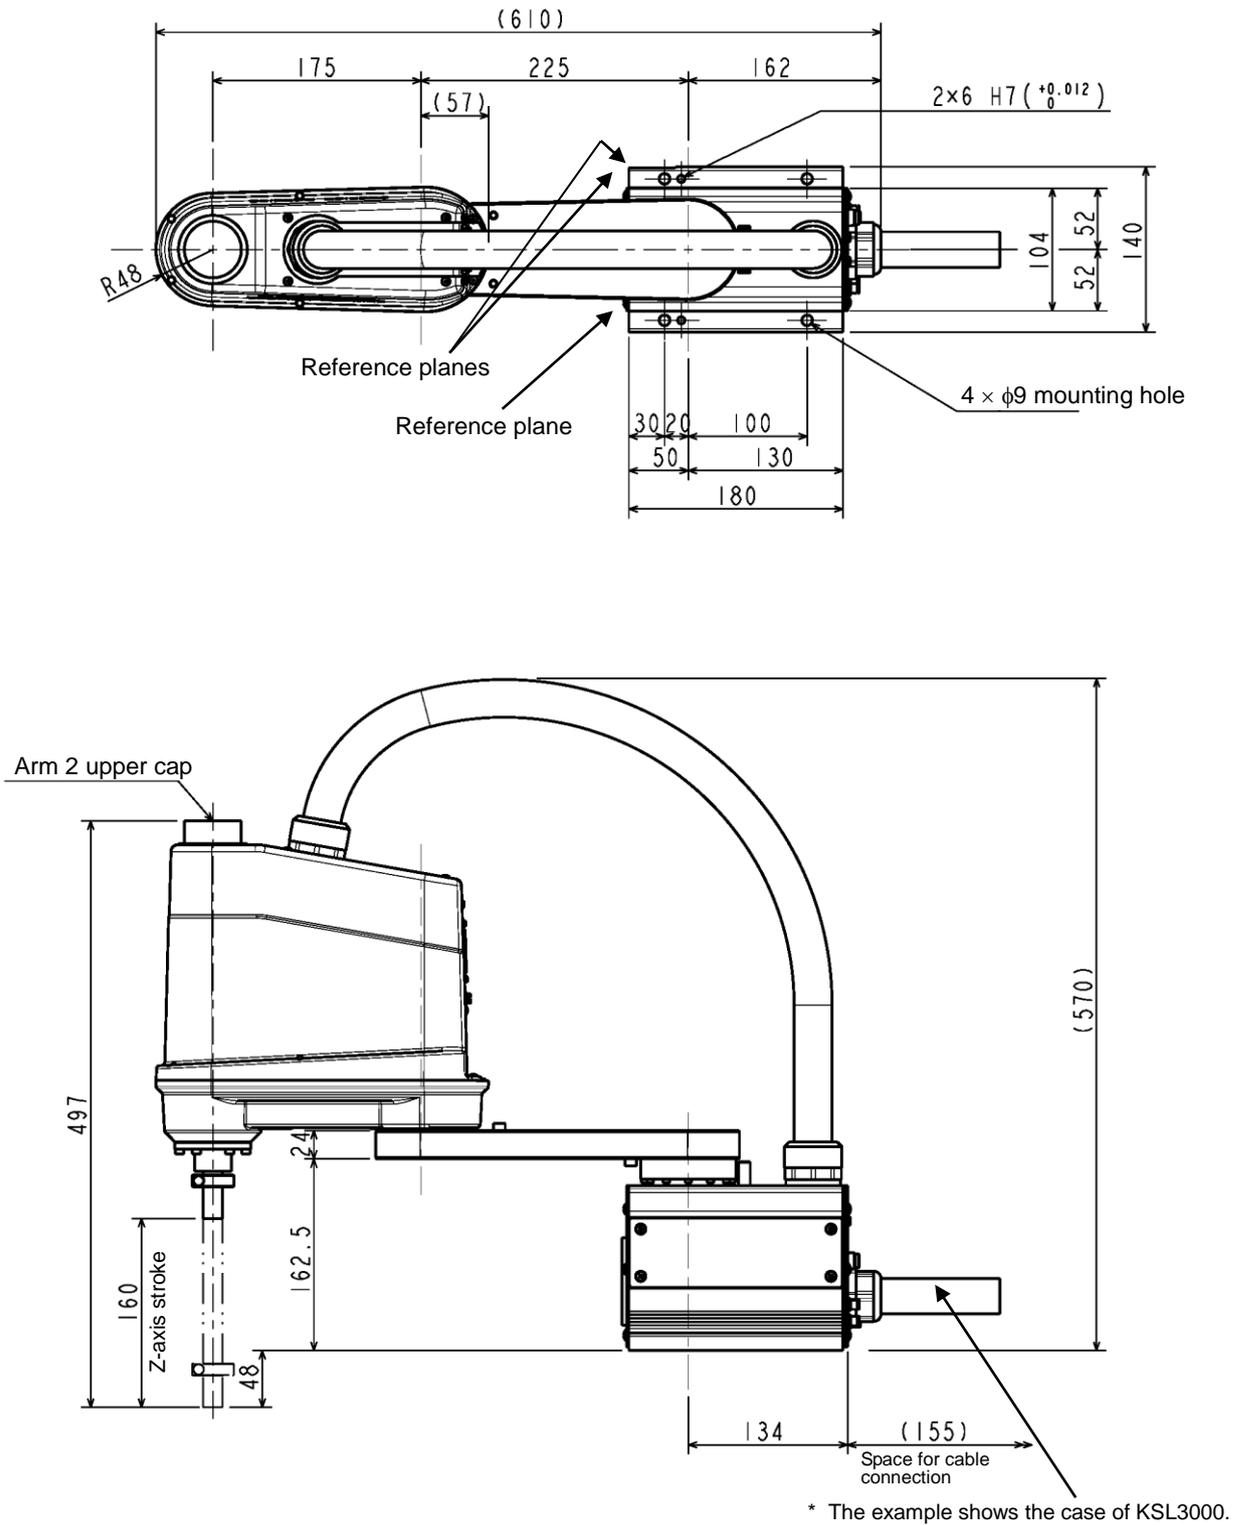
Outer dimensions of the robot (KHL-400NSCN)
